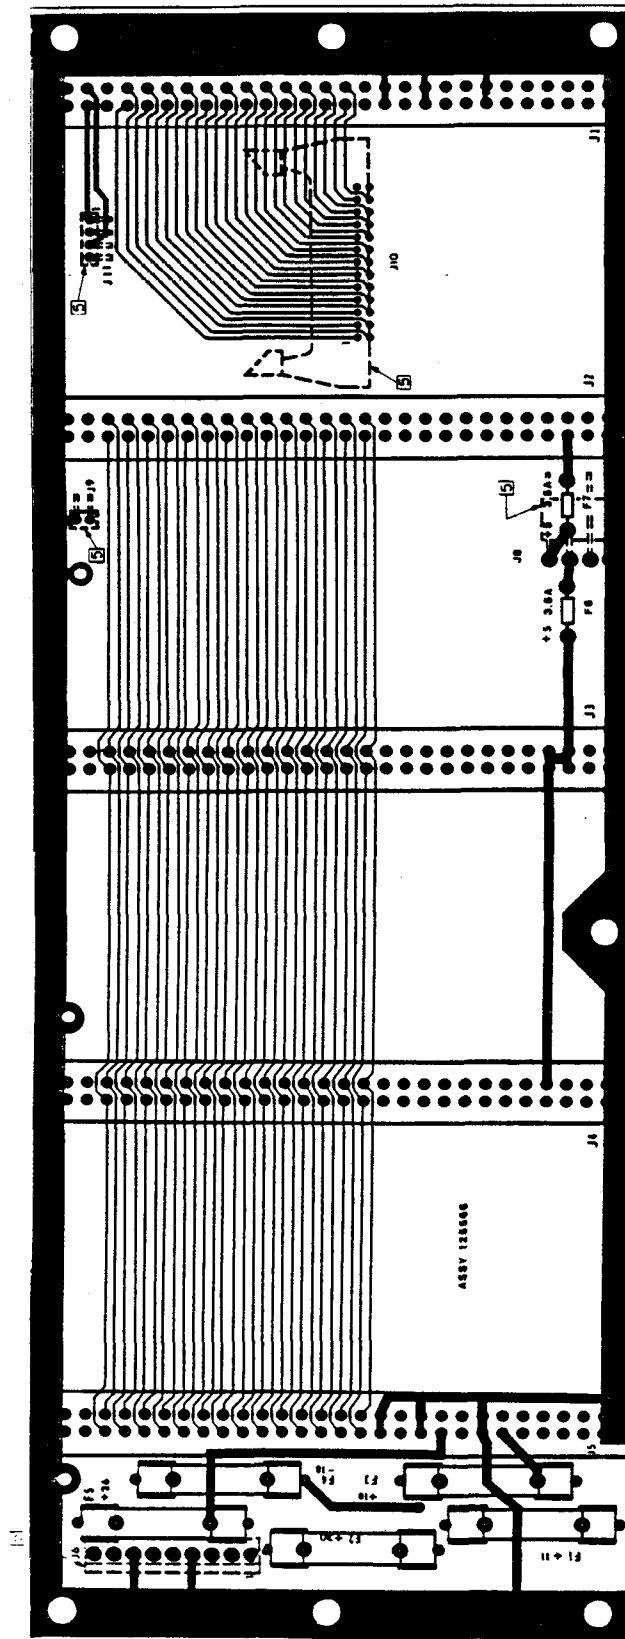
AS210A-PM Mainframe Motherboard Assembly
